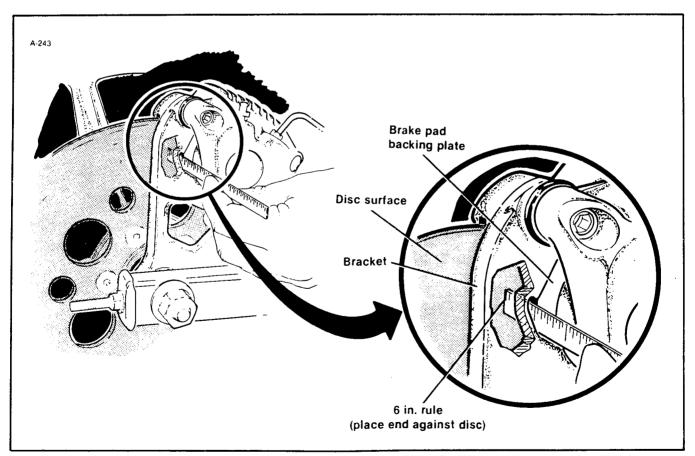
Measuring Rear Brake Outer Pad — 1982 & Later FXR, XL, XR; 1983 & Later FXSB, FXWG, FXDG, FXST, FLHS; Late 1983 & Later FXE Models
